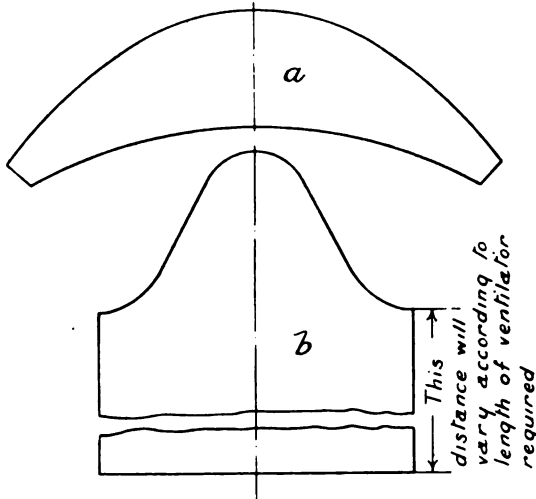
SHOWING SHAPE OF PIECES FORMING MODEL VENTILATOR.
